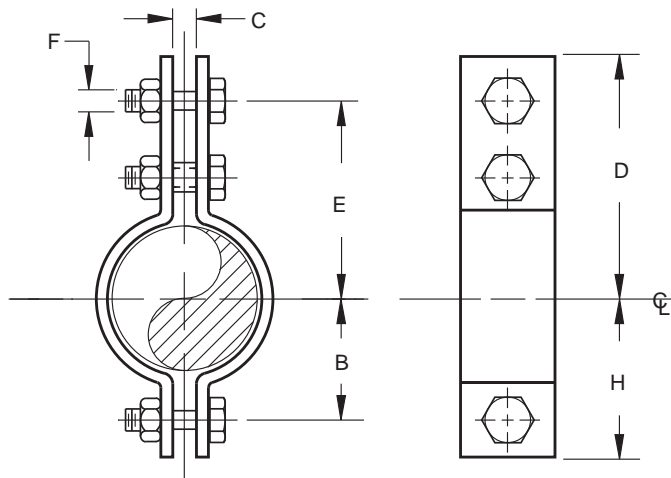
Z – ALLOY THREE BOLT PIPE CLAMP
